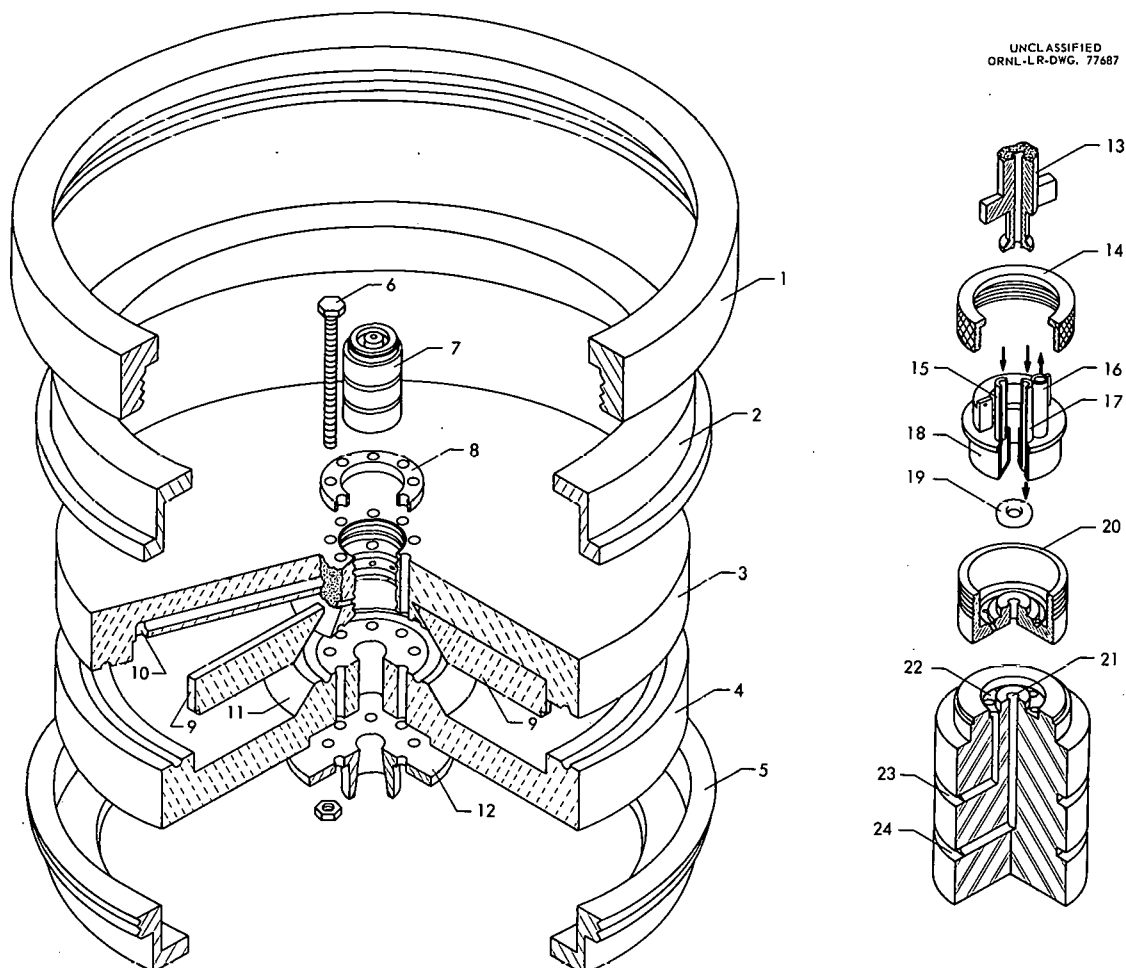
Schematic Drawing of Rotor A-V. (1) Coupling ring; (2) upper retaining ring; (3) upper end plate; (4) lower end plate; (5) lower retaining ring; (6) retaining bolts; (7) filled Teflon rotating seal; (8) bolt locating ring; (9) septa; (10) fluid line to edge of rotor; (11) conical-section core; (12) drive shaft adapter; (13) stationary seal flexible mount and fluid line to center of rotor; (14) stationary seal coupling ring; (15) coolant inlet; (16) coolant outlet; (17) fluid line to edge of rotor; (18) cooling jacket; (19) "O" ring; (20) stationary seal; (21 & 24) flow passage through rotating seal to center of rotor; (22 & 23) flow passage through rotating seal to edge of rotor.
